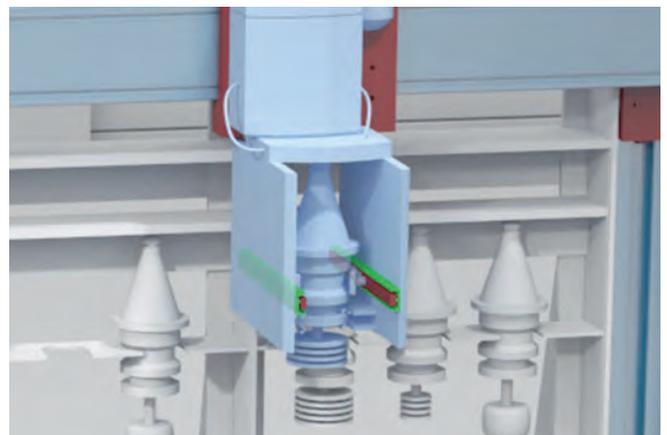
Tool changer: a bilateral stroke enables the telescopic rail to extract the tool and position it in CNC machine.
